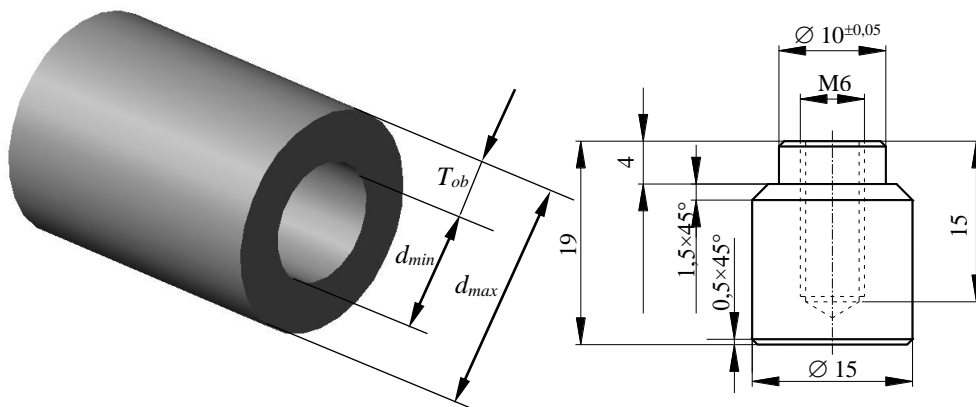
Tolerance space in the form of a hollow cylinder and workpiece
